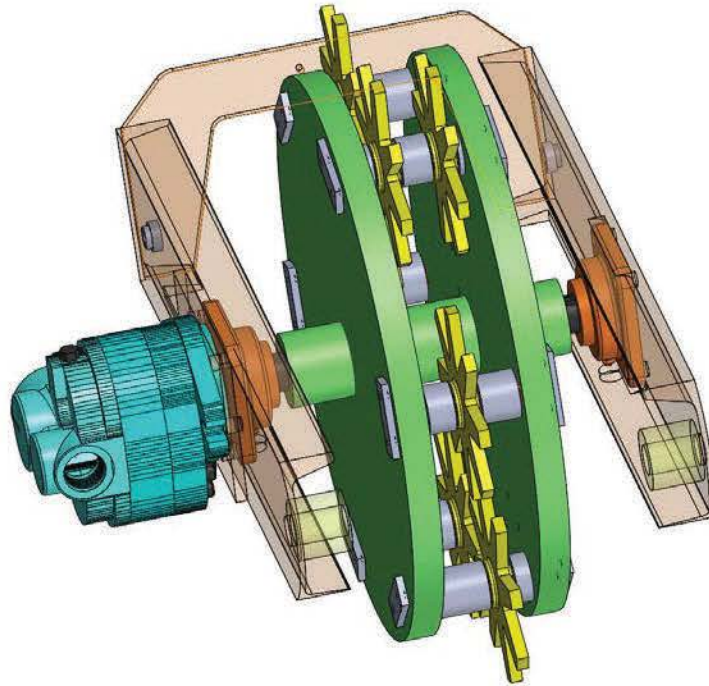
Conventional Router Engine Drivetrain and Encasement
